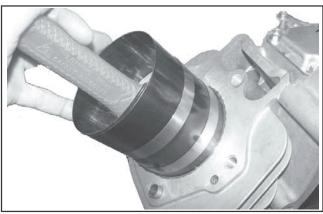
Installing Piston Assembly Using Ring Compressor Tool.
